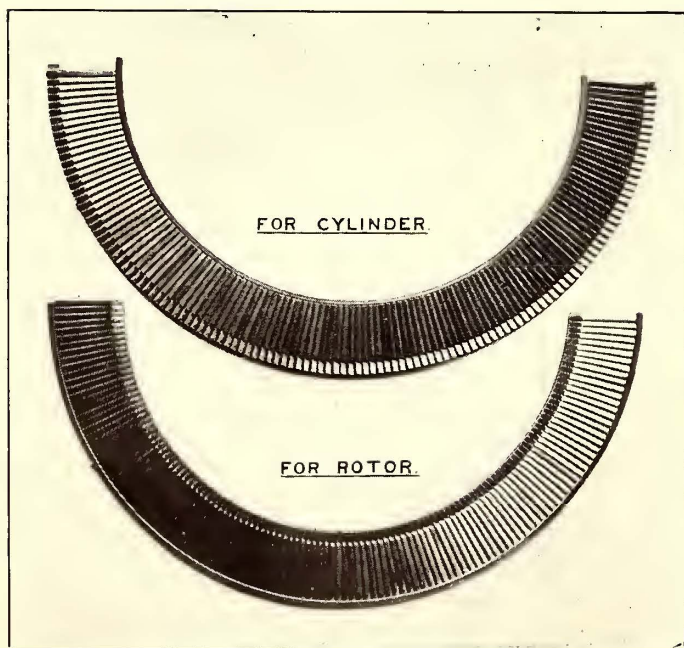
TWO HALF RINGS OF BLADES READY FOR ASSEMBLING
